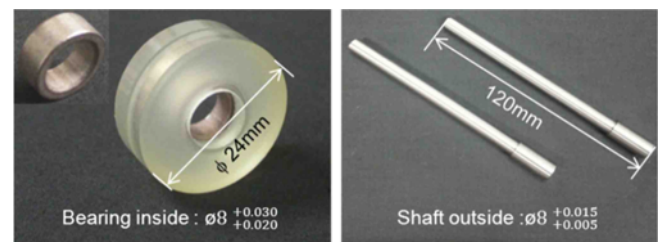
Bearing, bearing housing, and shaft used in the experiment
